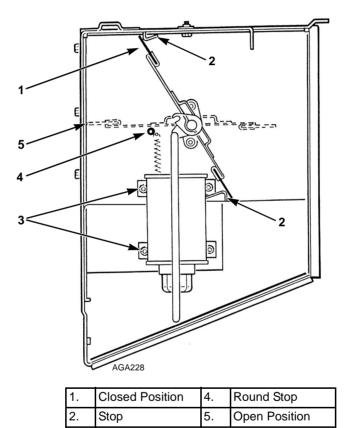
Damper Adjustment (Control Box Side Shown Compressor Side Similar)
